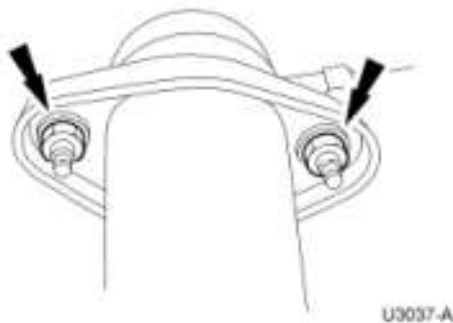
Locating Exhaust Manifold-To-Dual Converter Y-Pipe Nuts
